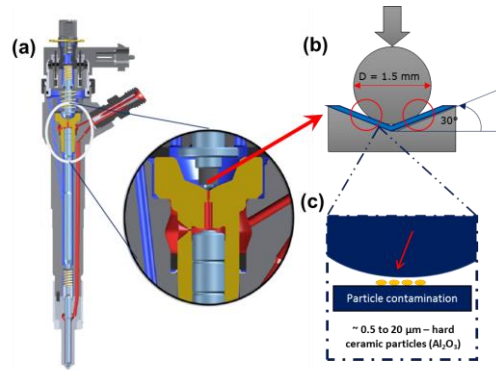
(a) A typical diesel injection system, (b) Ball valve design and (c) magnified view of the particle entrainment in the narrow gap between ball valve and counter body
